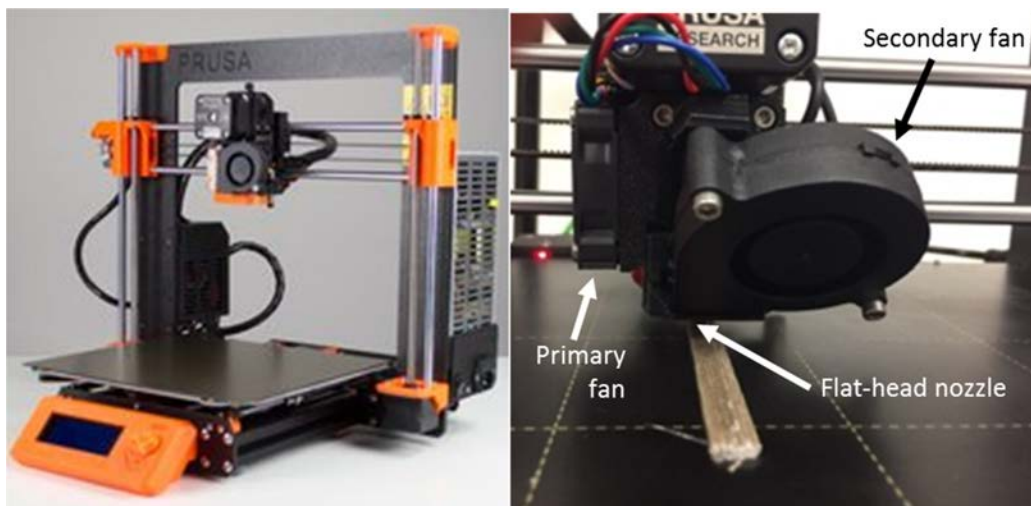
Photography of Prusa® MK3S 3D Printer (left) with a focus on modified printing head (right).
